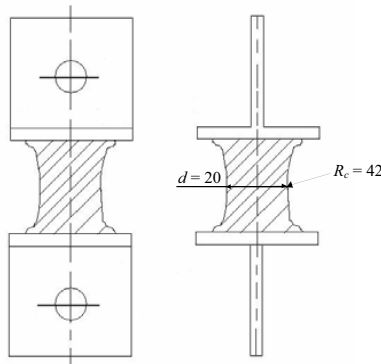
Specimen geometry for tension and torsion tests (dimensions in mm).
